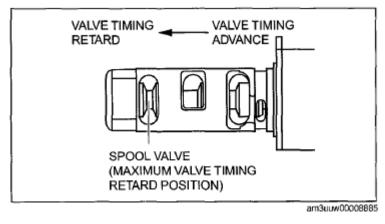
Identifying Spool Valve (Valve Timing Advance To Retard Position)
